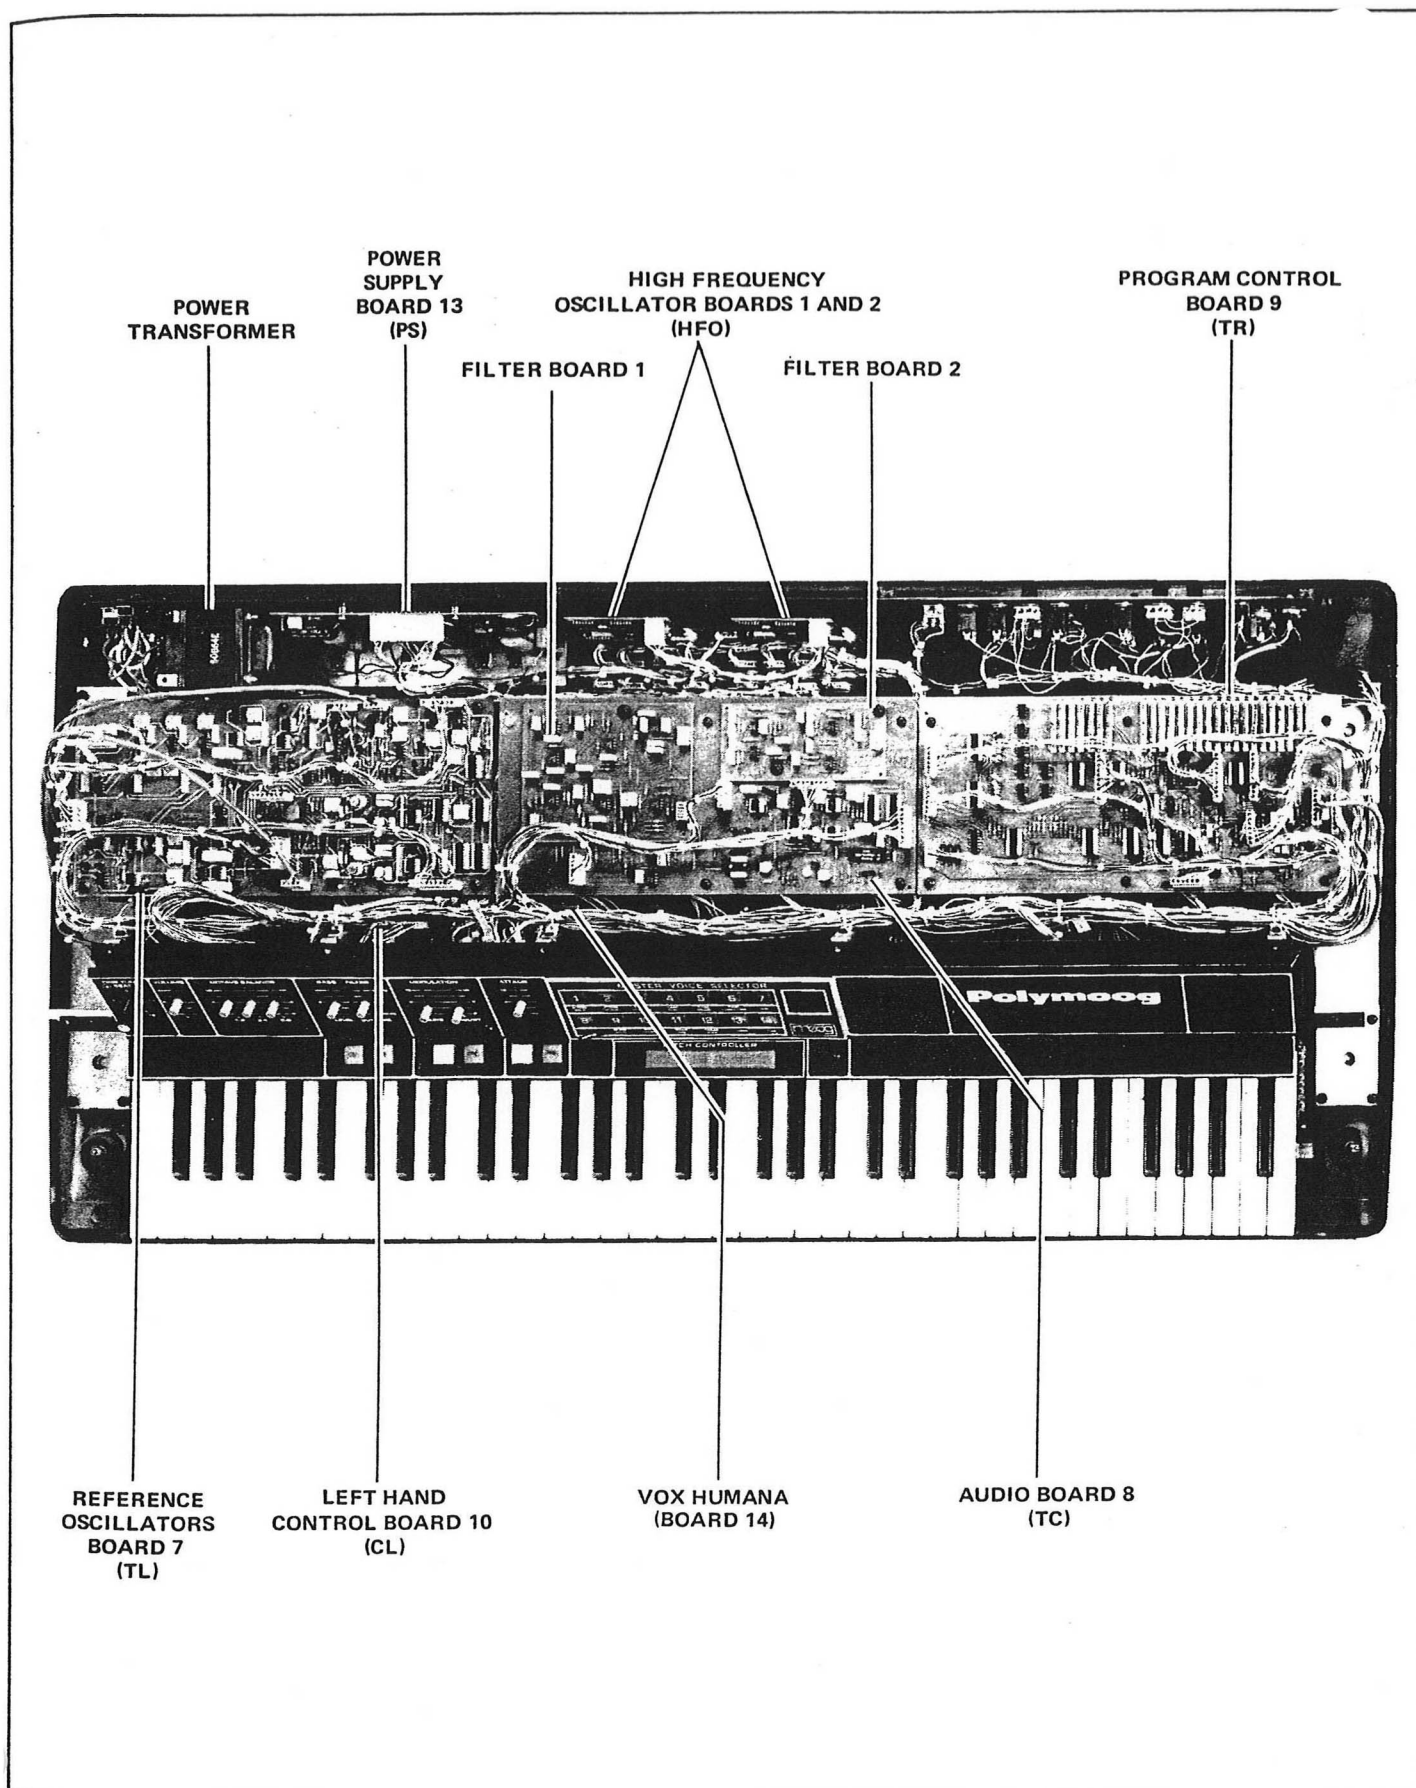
POLYMOOG KEYBOARD PRINTED CIRCUIT BOARD LOCATION
